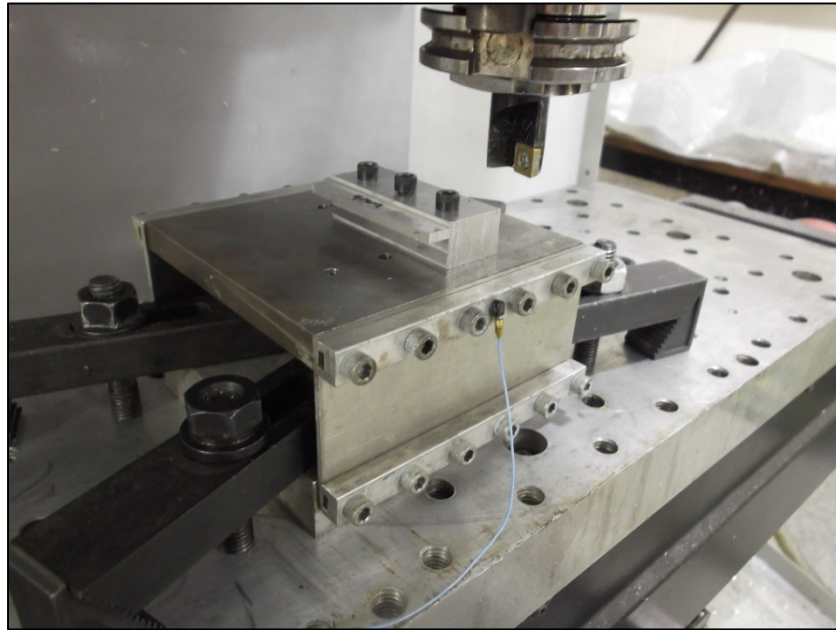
SDOF parallelogram leaf-type flexure for orthogonal stability testing with 6061-T6 aluminum finned workpieces.
